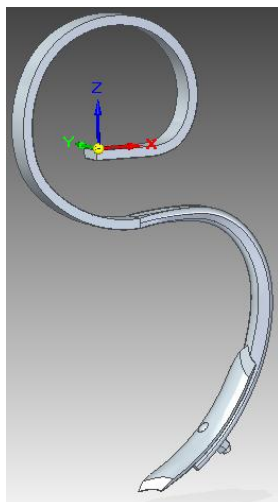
Drawing of the tip base with the cross-section drawing [Own elaboration]
